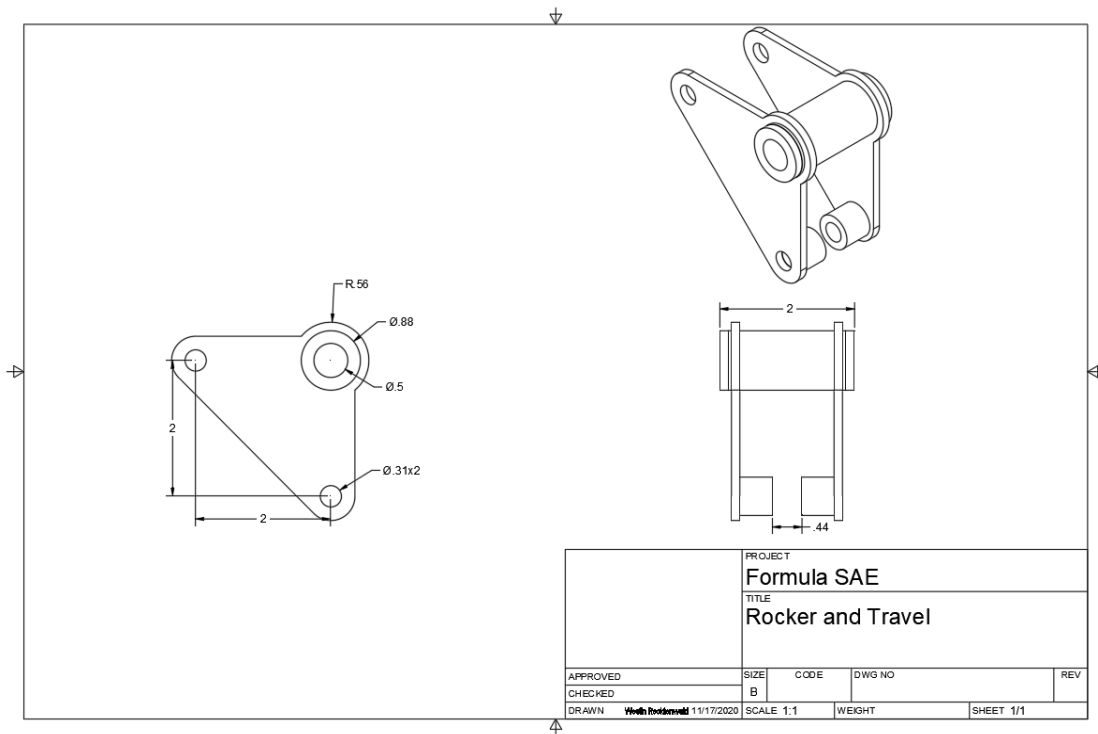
Dimensioned Drawing of Rocker in RWS subsystem.
